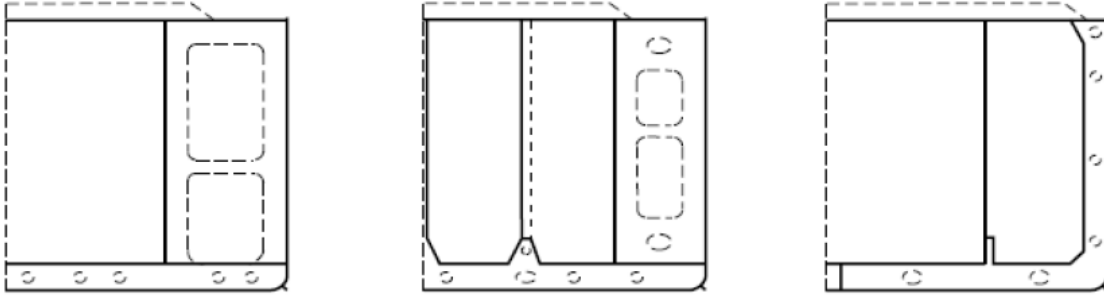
Typical midship sections of Self-Unloading Bulk Carriers
